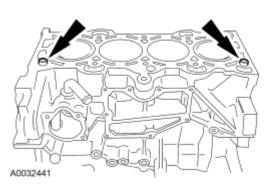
Identifying Cylinder Head Alignment Dowels Courtesy of FORD MOTOR CO.
